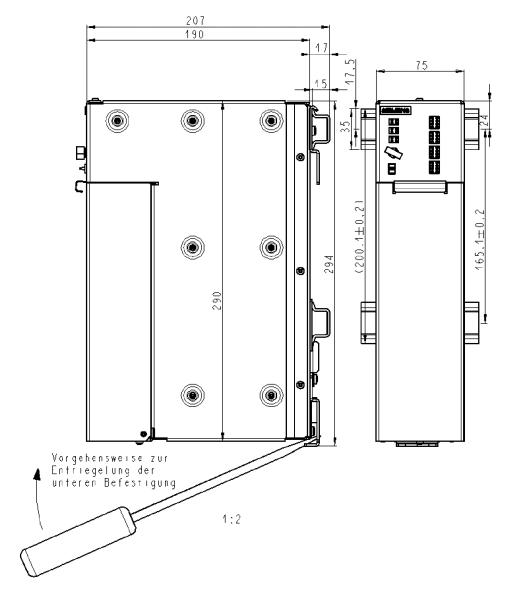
Dimensional drawing of the DIN rail mounting
